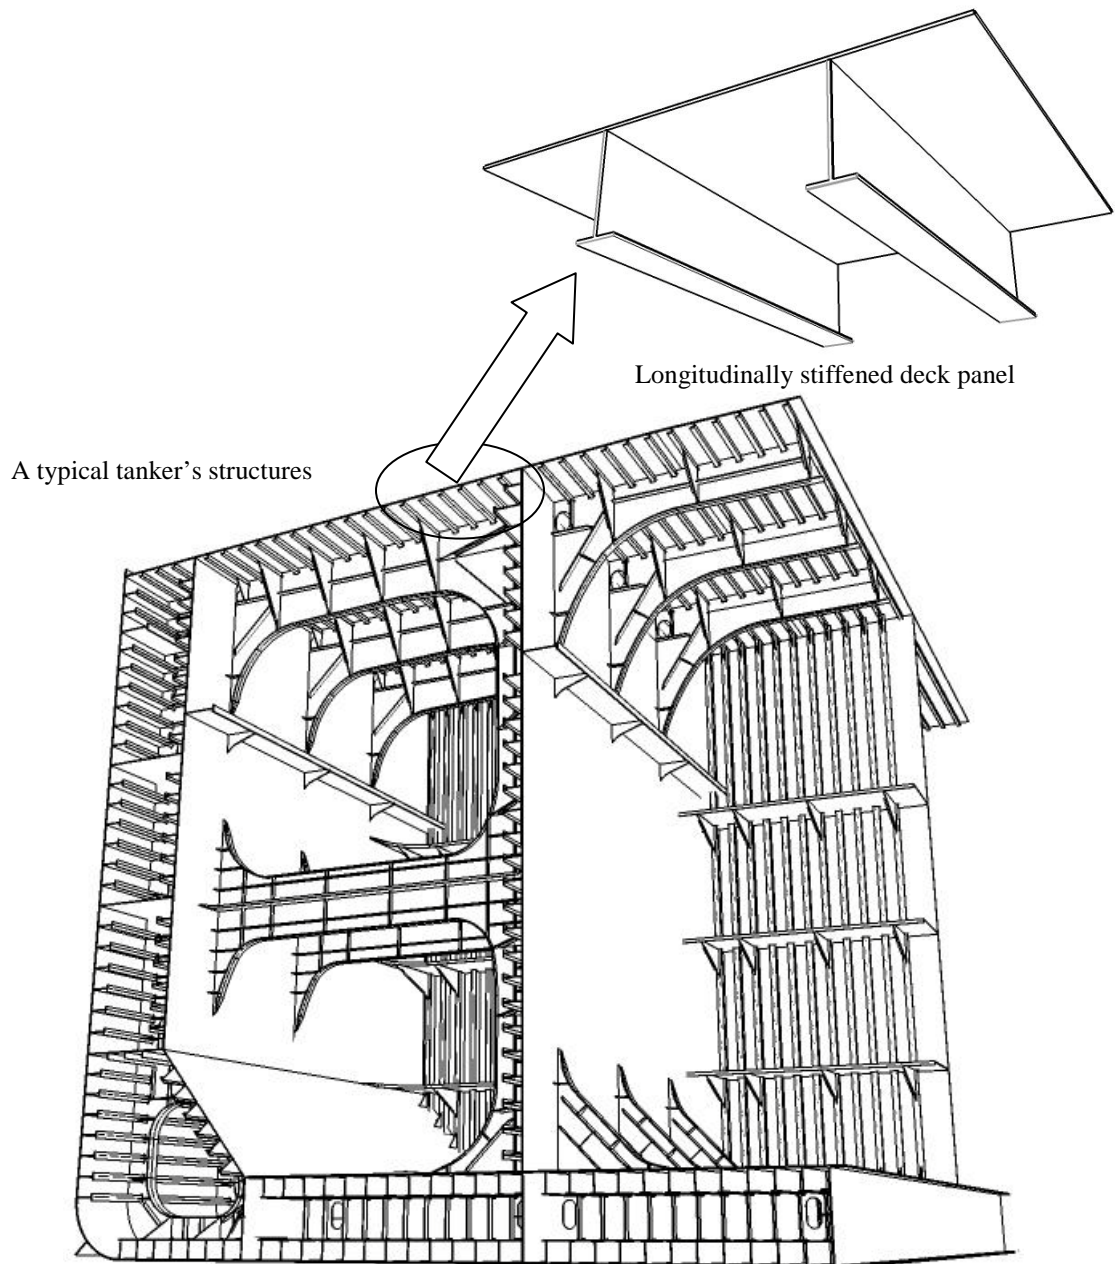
A typical tanker's structures and a longitudinally stiffened deck panel
